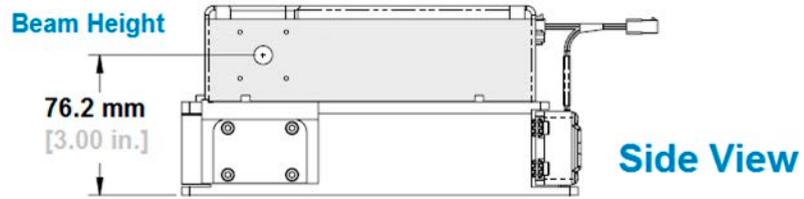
Dimensions – Fan-Cooled Heat Sink, Side View
